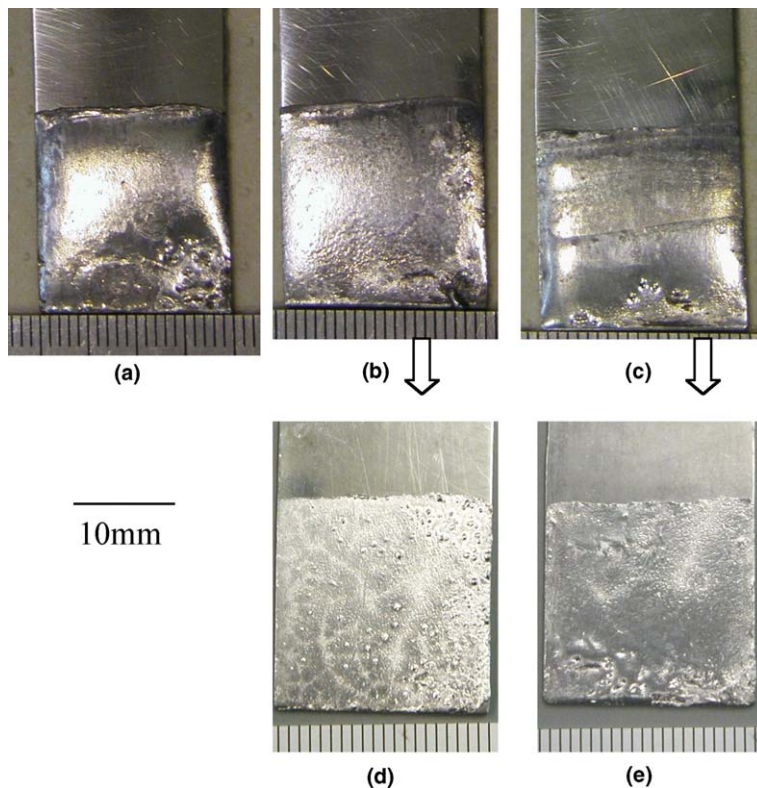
Immersion test of solder coated plate. (a), (b) and (c) showed before immersion.
